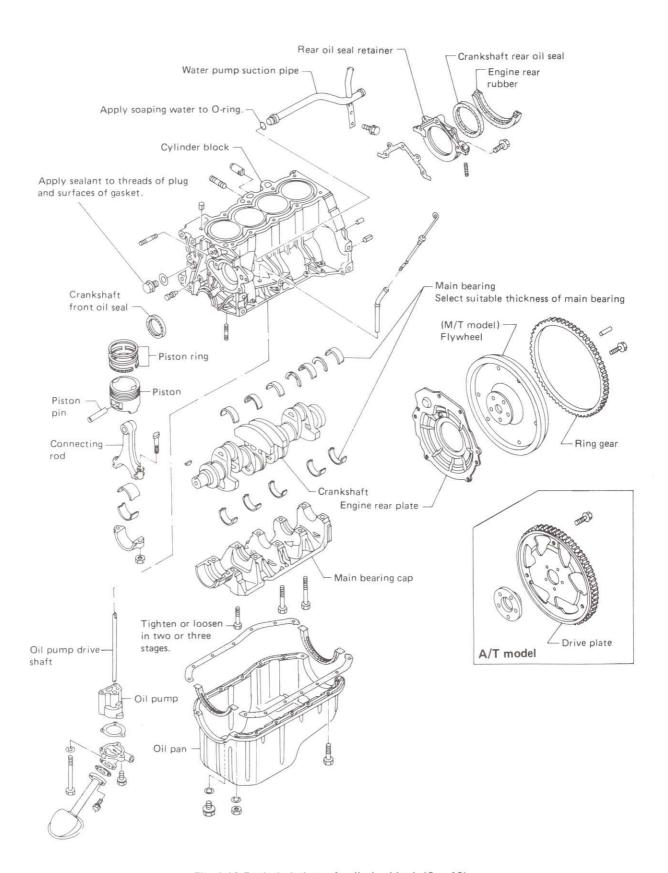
Exploded view of cylinder block (Sec 18)
